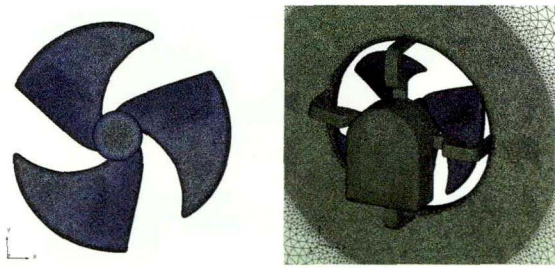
Shape of axial flow fan and assemblies with motor, strut and shroud
